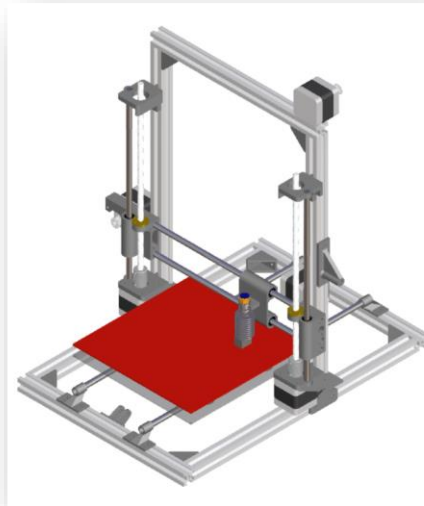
Highlighted the work - piece area of a Two – Axis Computer Numerical Controlled Foam Cutting Machine
